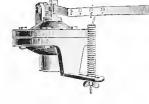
Automatic Fire Regulator and Pressure Indicator Combined.
